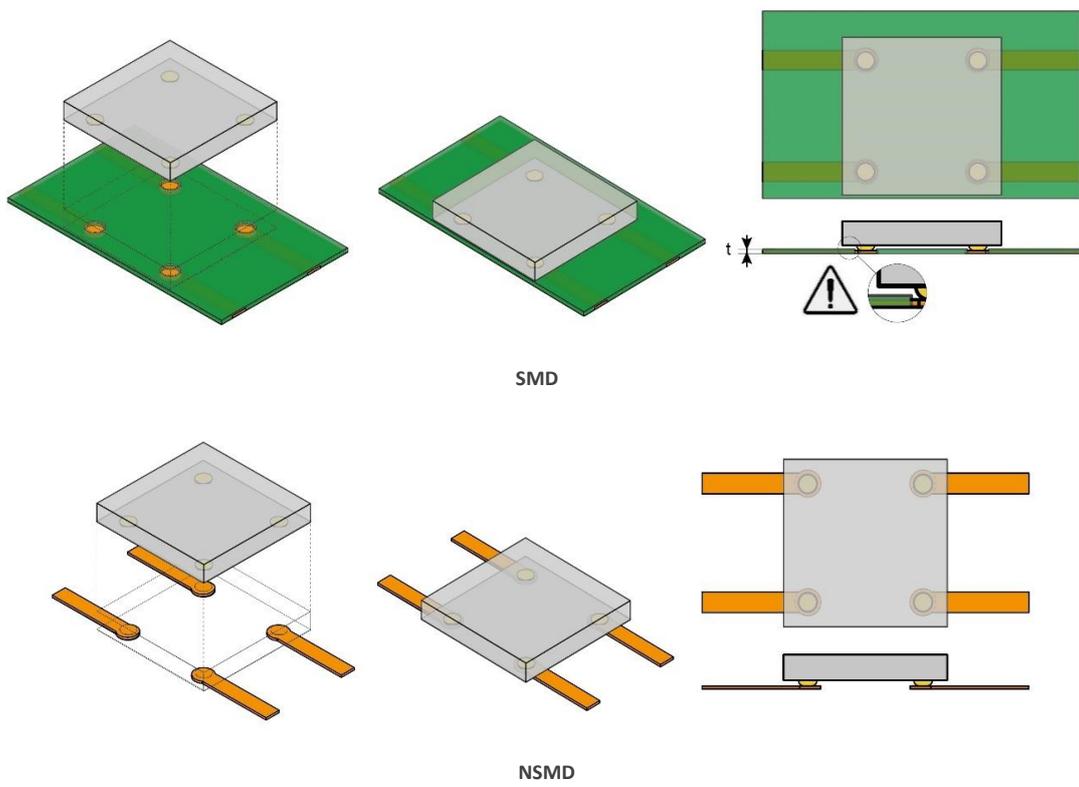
Placement of the four-pad Silicon capacitor on its PCB footprint
